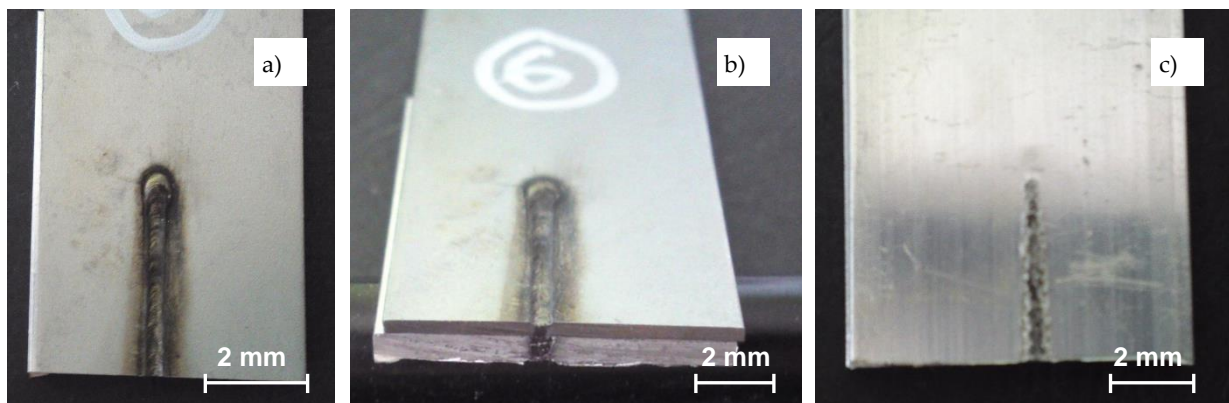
Weld face a) weld cross-section; b) weld ridge – high porosity visible; c) sample No. 6
